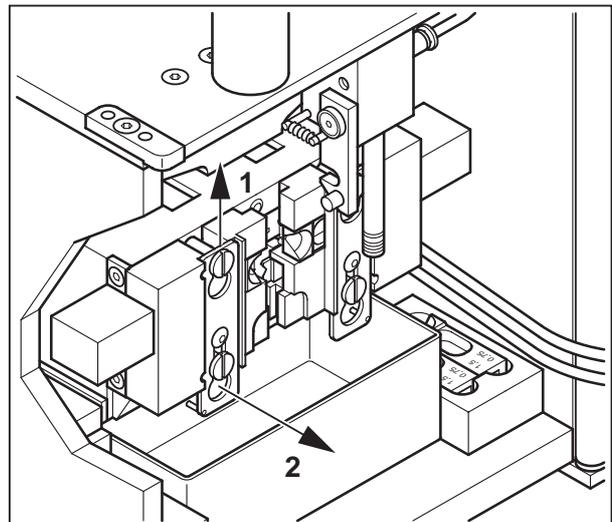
Remove the holding fixtures for the litz wire centring funnel
